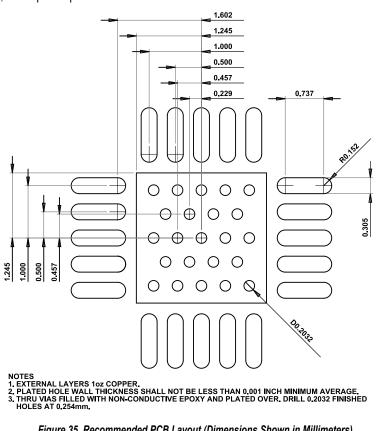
Recommended PCB Layout (Dimensions Shown in Millimeters)
